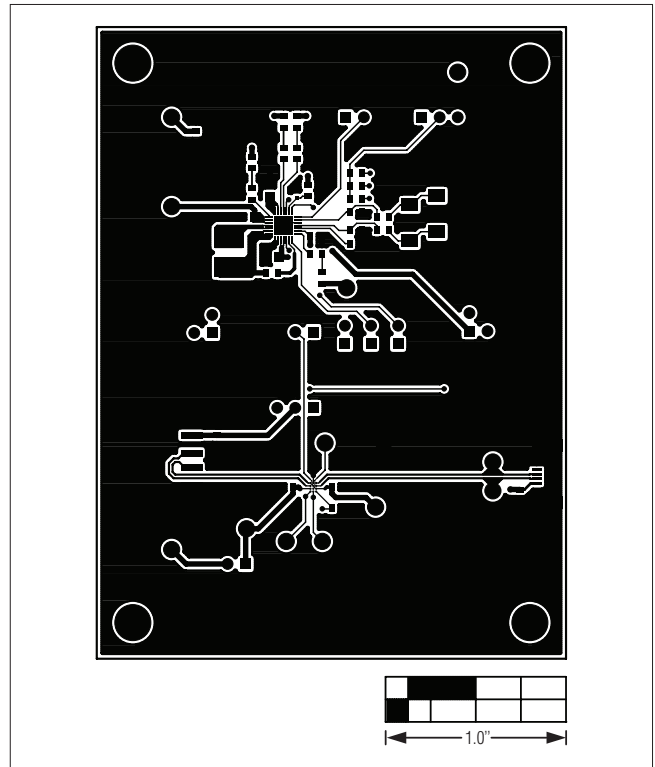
MAX14578A EV Kit PCB Layout—Component Side
